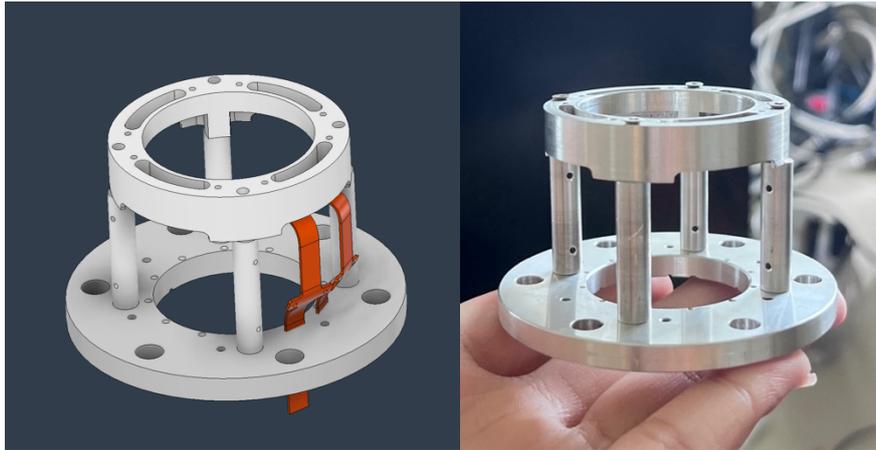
(a) 3D CAD design of the holder. (b) Completed holder assembly.
